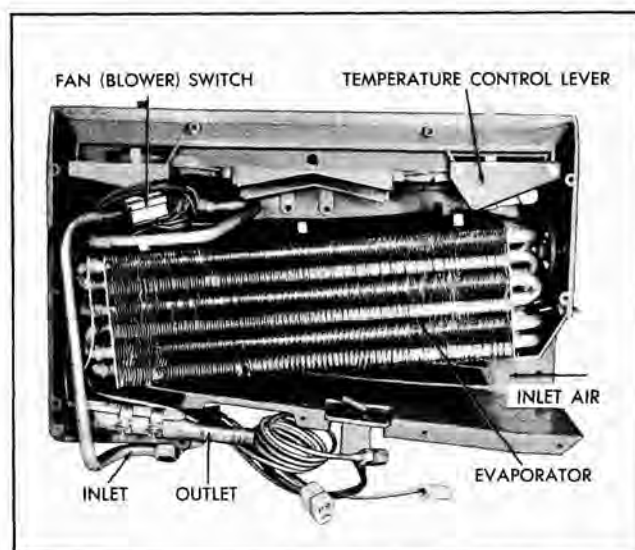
Viewing Evaporator with Lower Pan Removed
